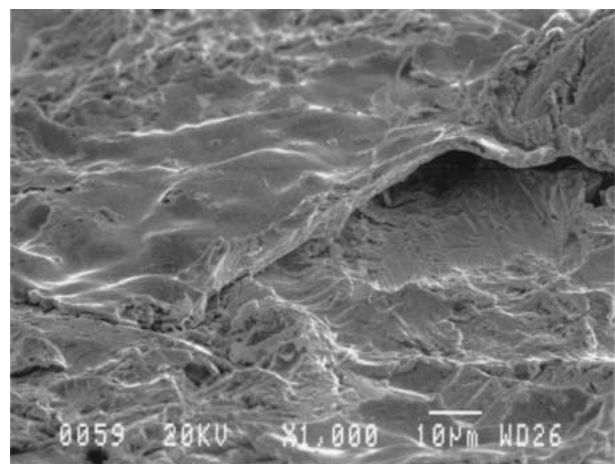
Adhesive failure of HVOF NiCr coating. Grit blasted substrate is seen in the lower right corner.
